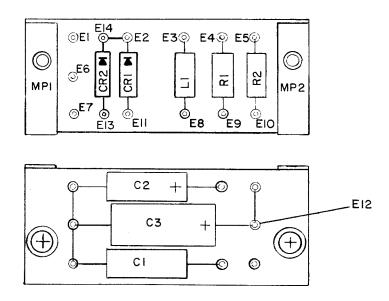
IF Filter Assembly A2A15, Component Locations
